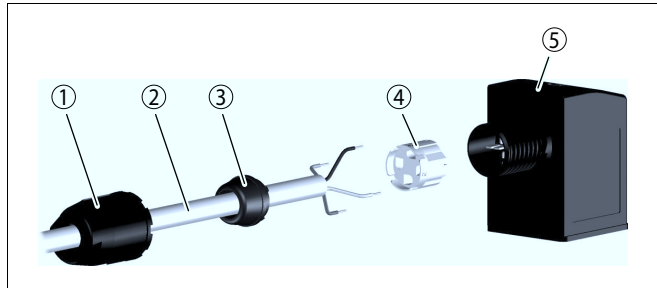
Connection, valve plug ISO 4400 with IDC crimping technology
